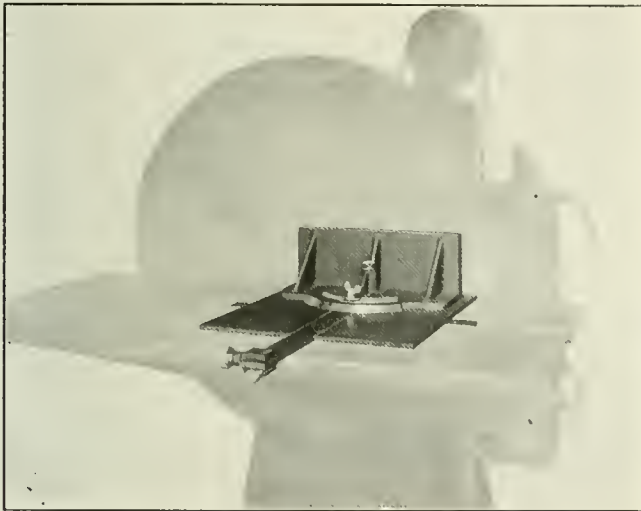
Universal Duplicating Gage for Grinding Sectors, etc.
